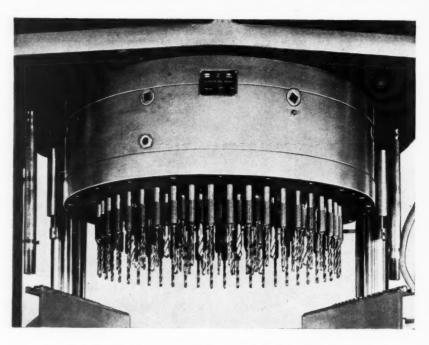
Multiple-spindle Zagar gearless drill head which permits changing quickly from one job to another
